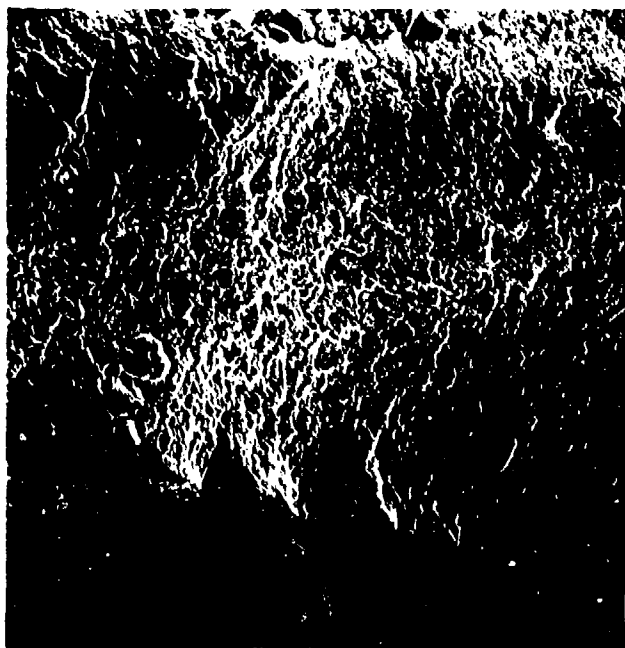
Secondary origin of fatigue failure of a temper-embrittled A-514 weldment 70x.
